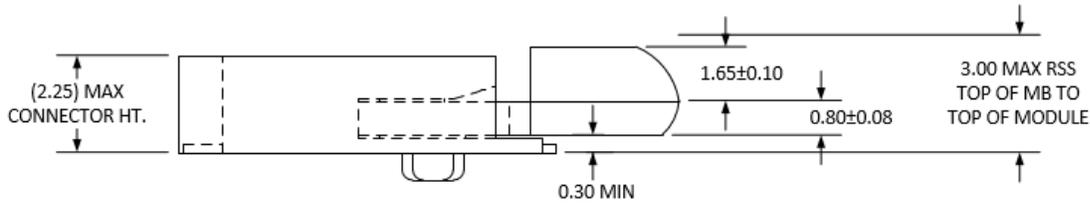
H2.3-S4- Stack-up Top Mount Single-sided Add-in Card for 1.75 Maximum Top-side Component Height and with Higher Clearance above Motherboard
